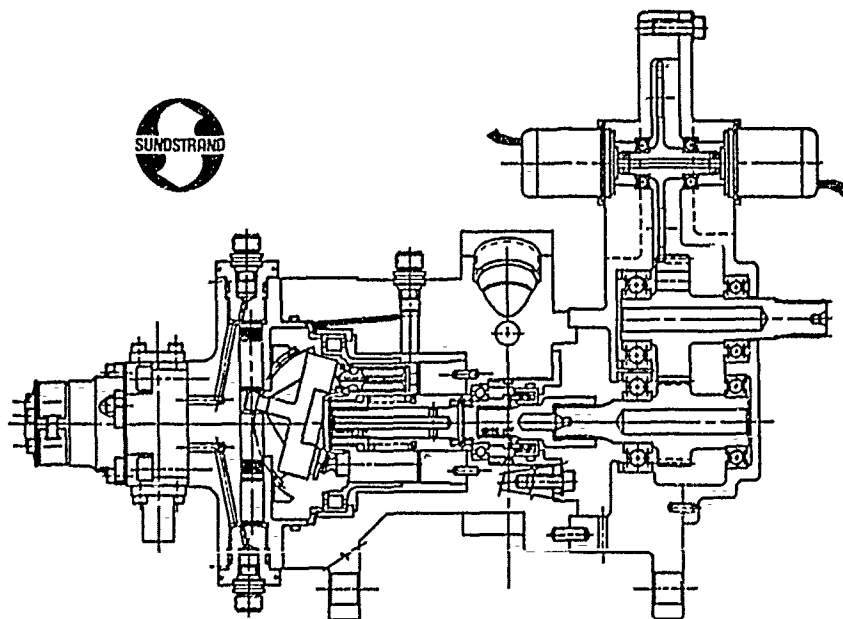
Sundstrand - LEF Power Drive Unit Detail Drawing
